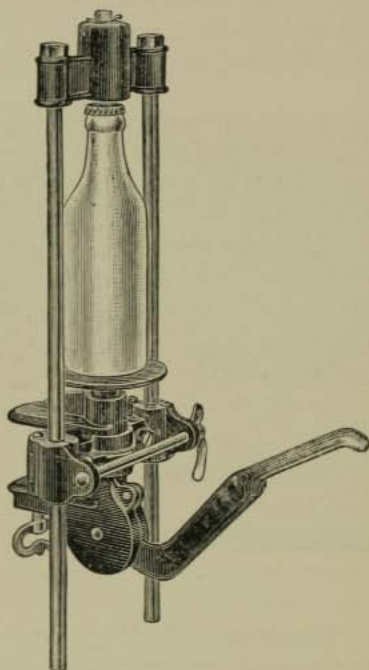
A hand bottle sealing machine. (Enterprise Manufacturing Company, Philadelphia.)
